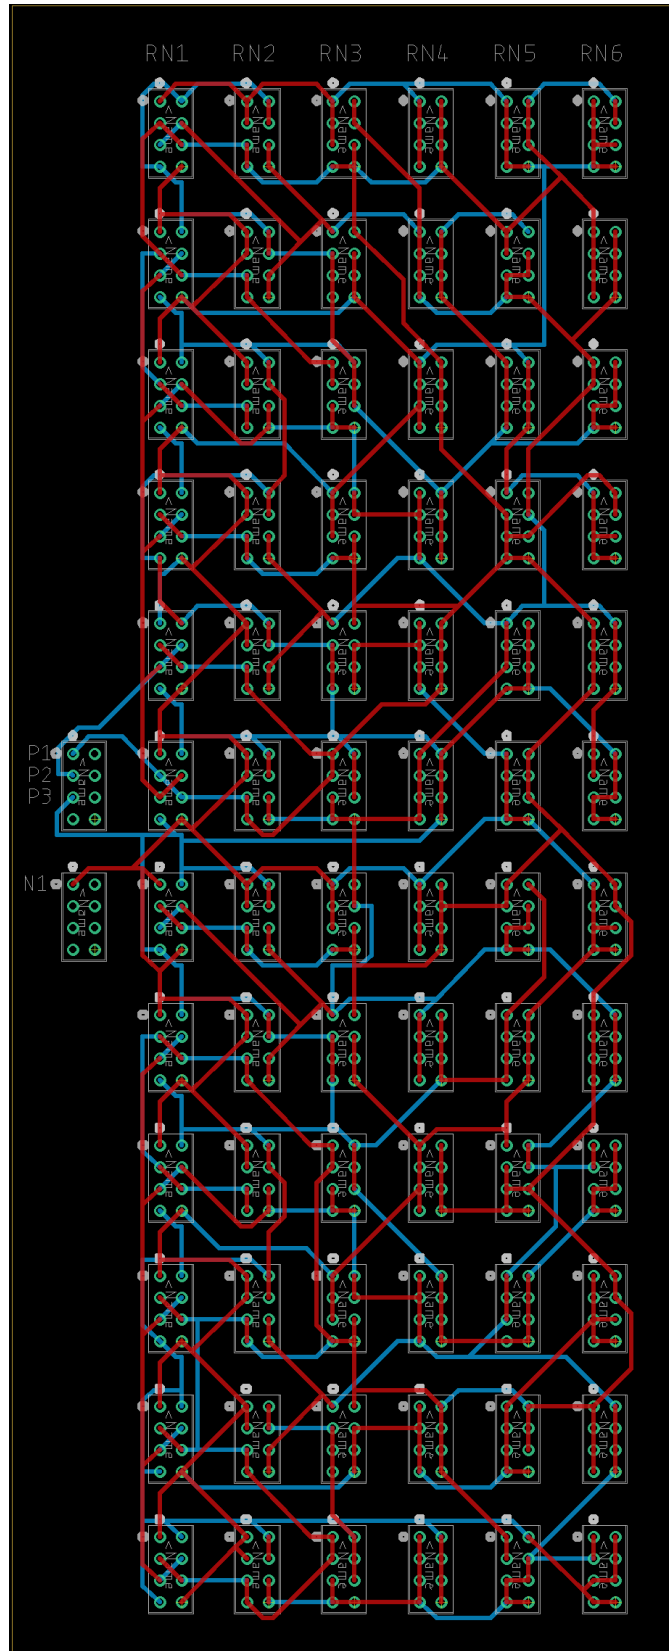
Schematic layout of the voltage-deriving PCB used to demonstrate the MQW beam steering metasurface. Depending on the required RN value, the 8-pin headers on the sample-mounting PCB were connected to one column of the 8-pin headers located on the voltage-deriving PCB.
